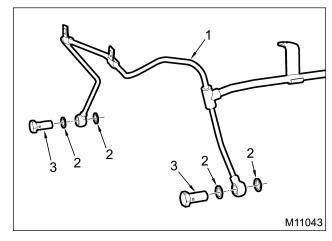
Injector return tube assembly, bonded seal washers, and banjo bolts
